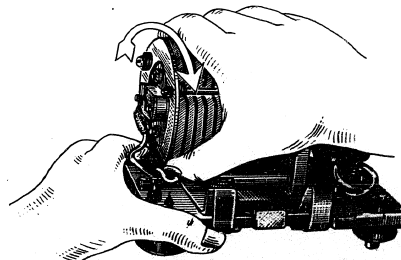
Checking Regulator for Secure Installation on Terminal Block
